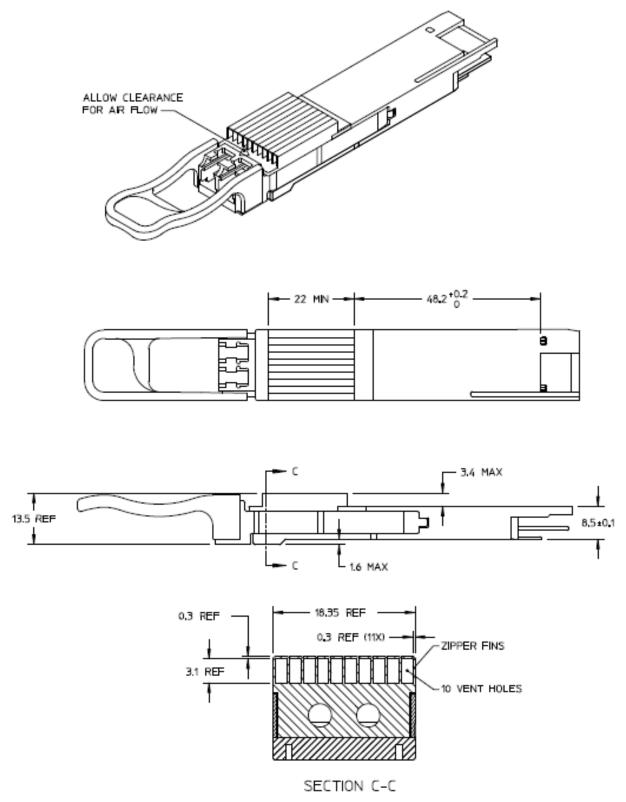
Type 2A Zipper Fin Heat Sink Example
